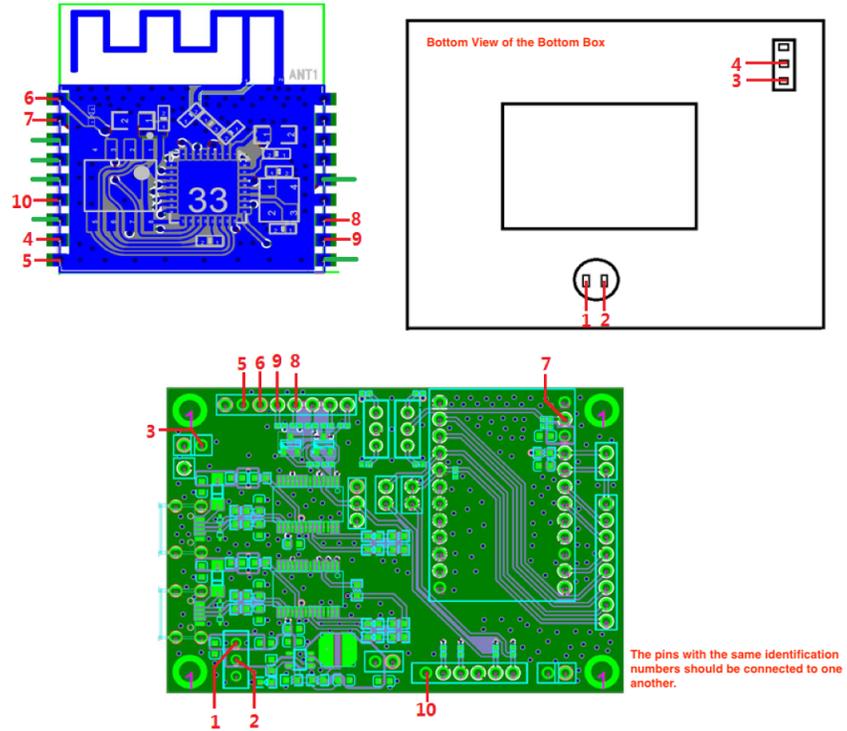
The Wiring of the ESP-WROOM-02 Fixture
